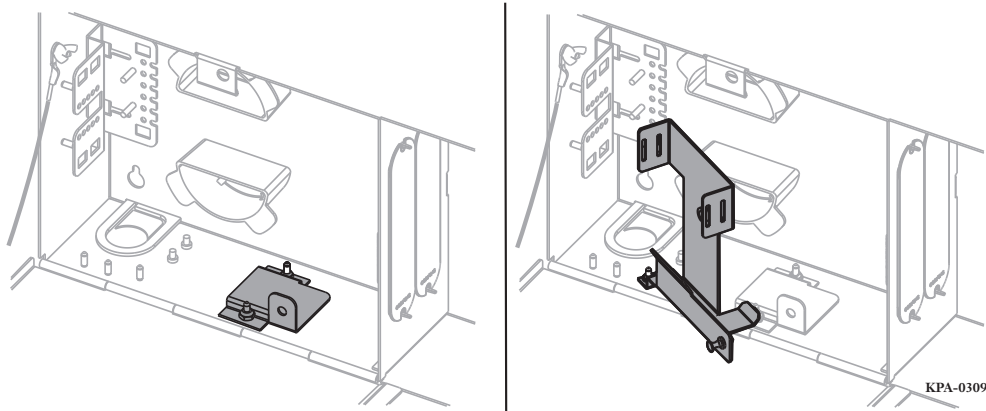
Install Bracket and Holder (Cable not shown for clarity.)
